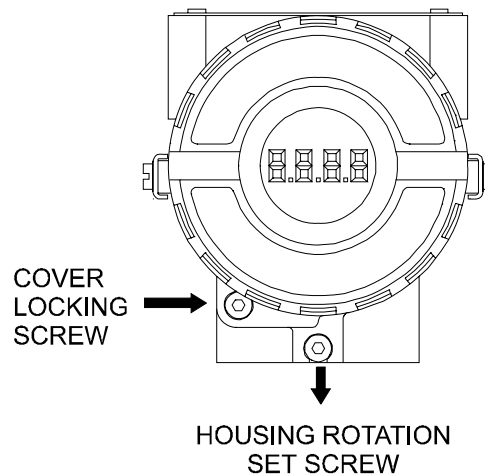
Cover Locking and Housing Rotation set screw
